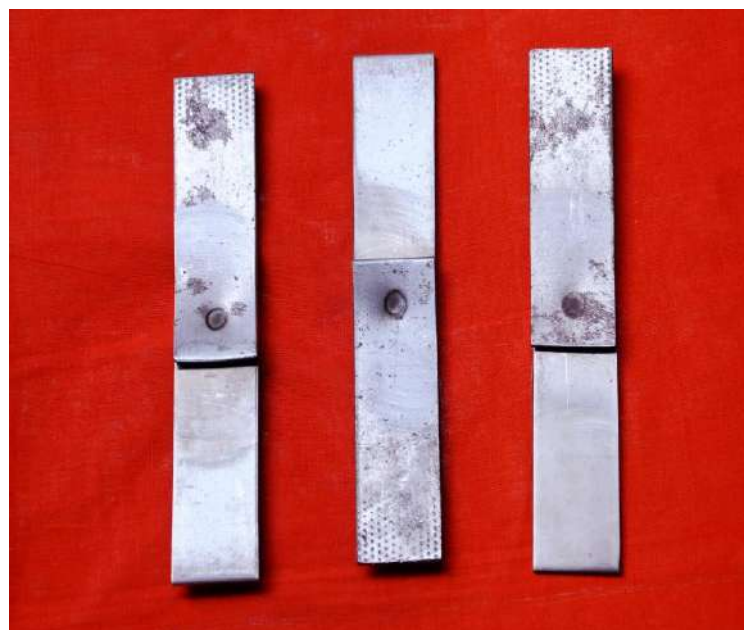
Photographic view of the AISI1020-AISI1020 samples after the weld
